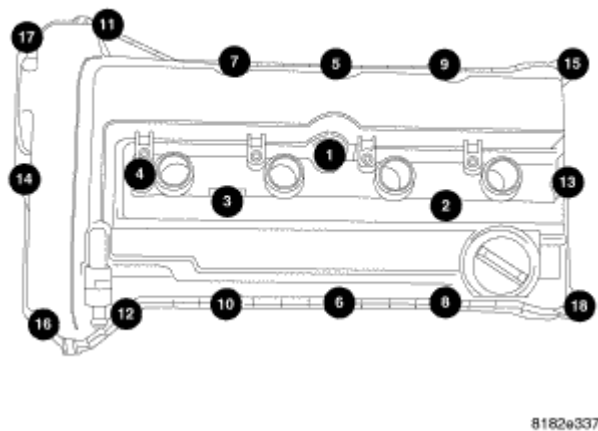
Cylinder Head Cover Bolt Torque Sequence
